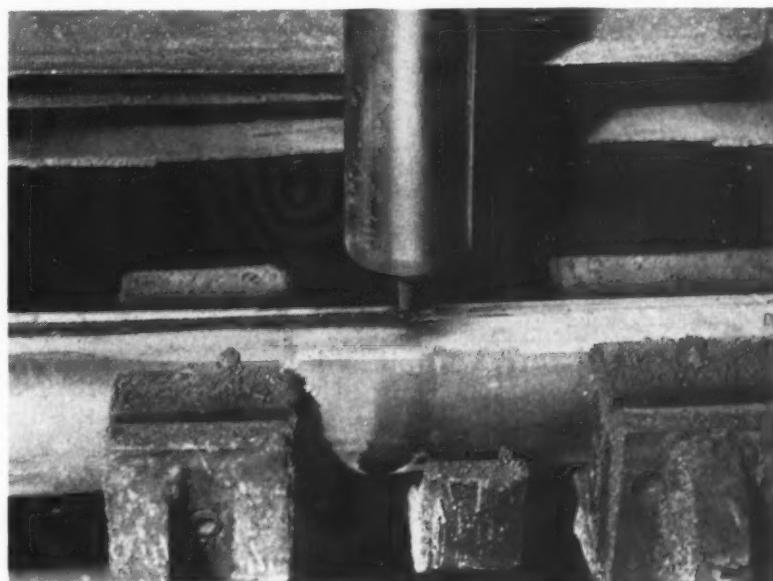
Close-up View of a Partly Completed Weld on the Rear-axle Housing
